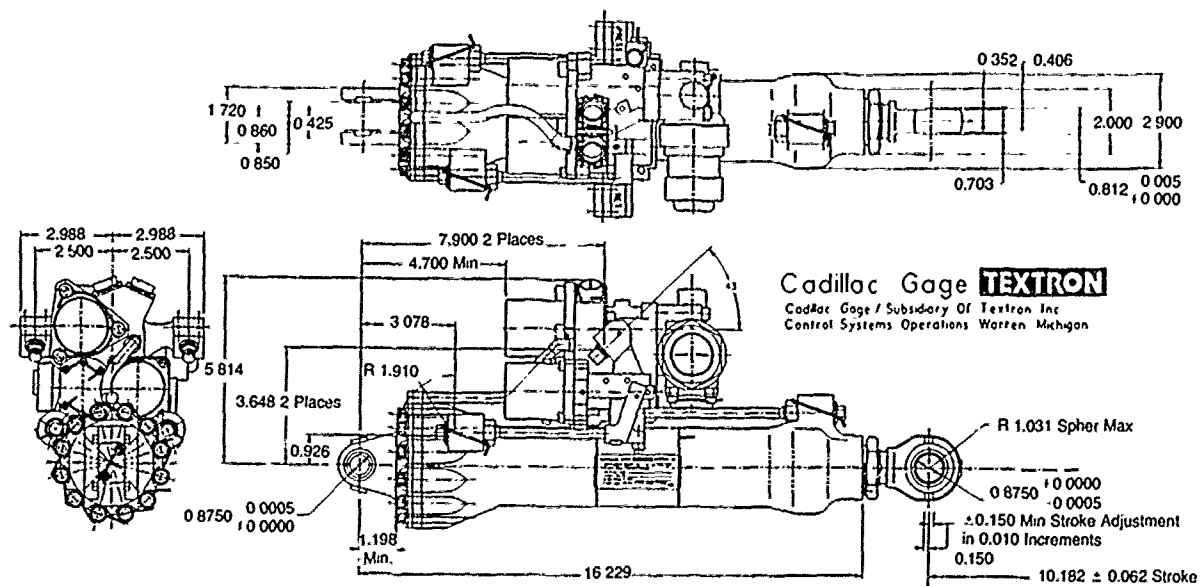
Cadillac Gage - Diffuser Ramp Actuator Outline Drawing
